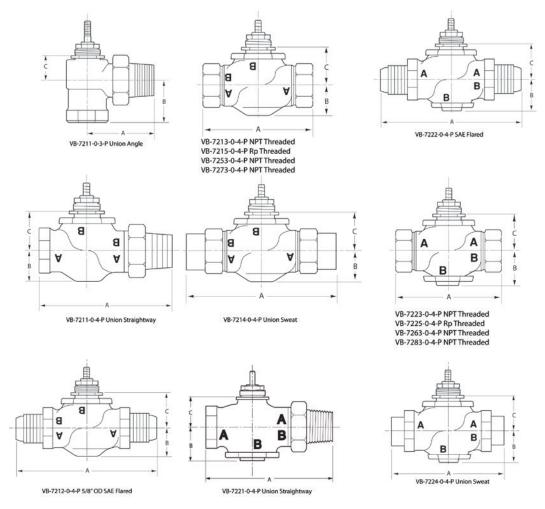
2-Way VB-7xxx Valve Body Dimensions
